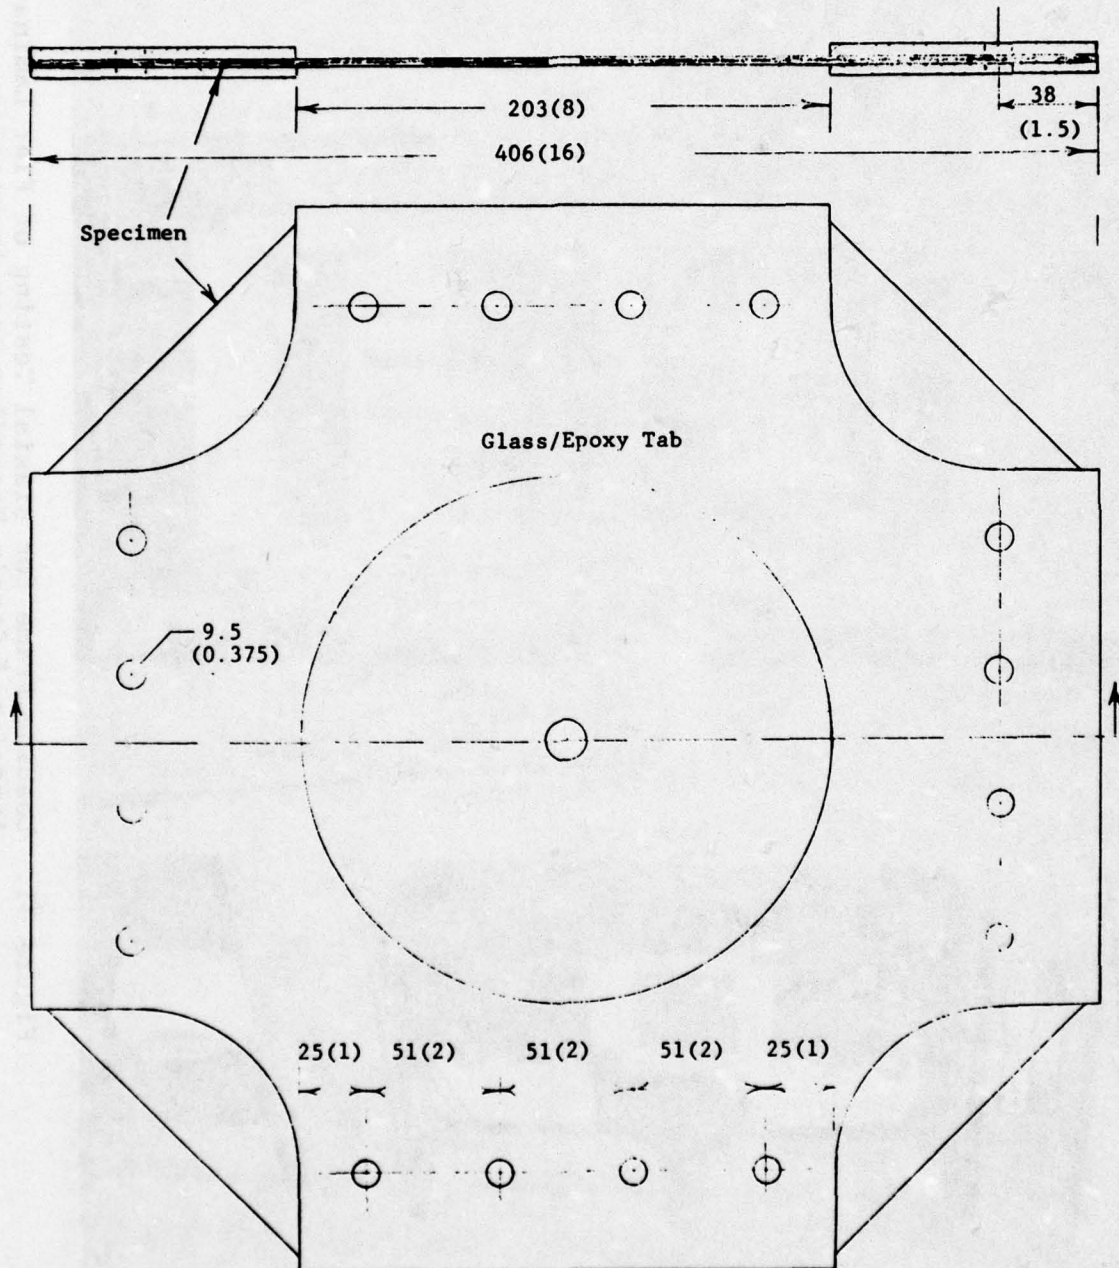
Sketch of Biaxial Composite Specimen (Dimensions are in mm and inches)
